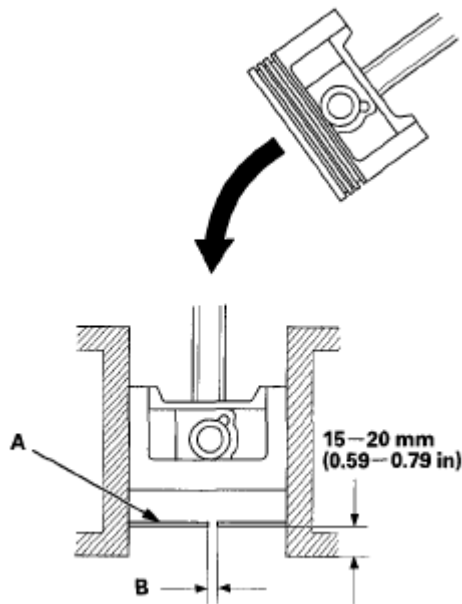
Pushing Ring Into Cylinder Bore 15-20 mm (0.59-0.79 in) From Bottom Using Piston
